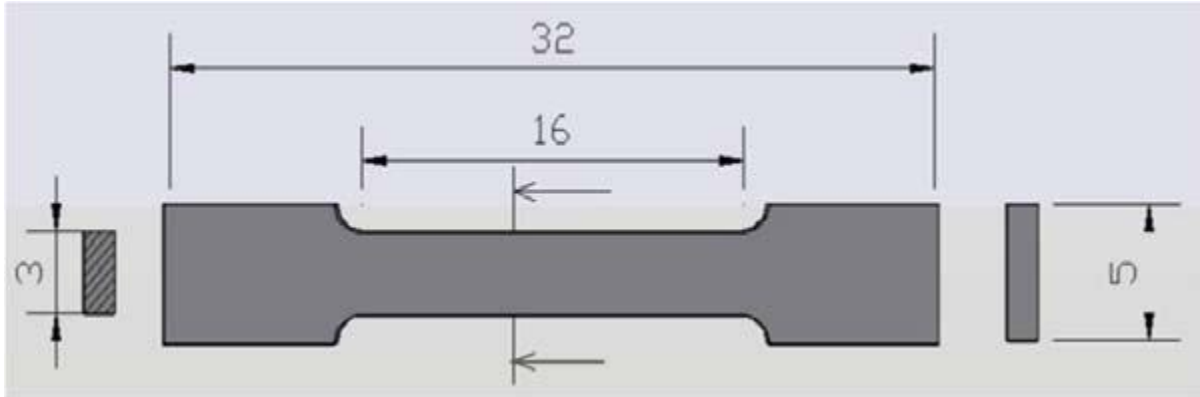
Tensile/Fatigue Specimen Dimensions[mm].
